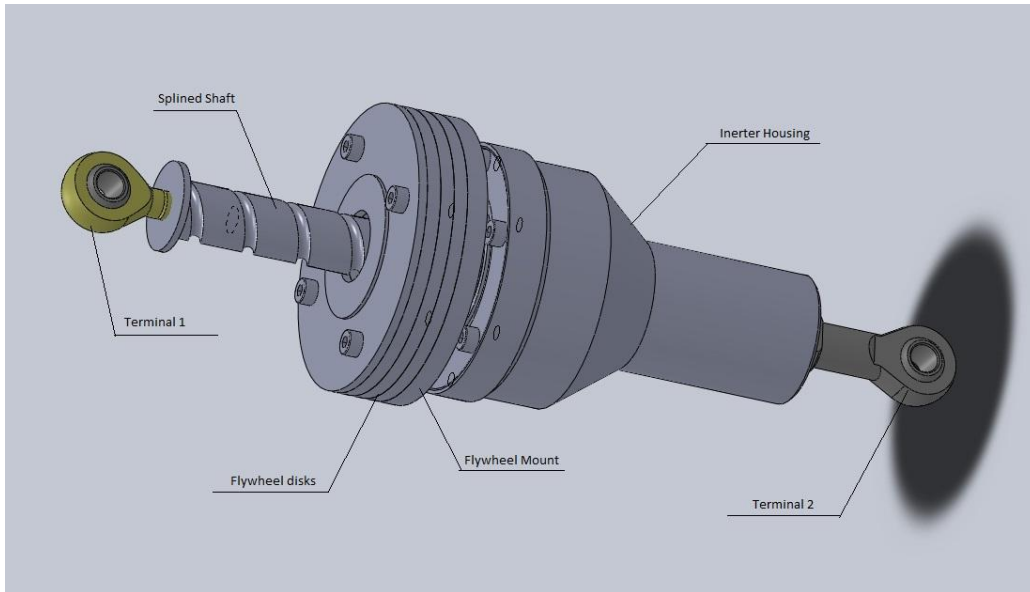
Detailed 3D CAD design of a ball-screw inerter
